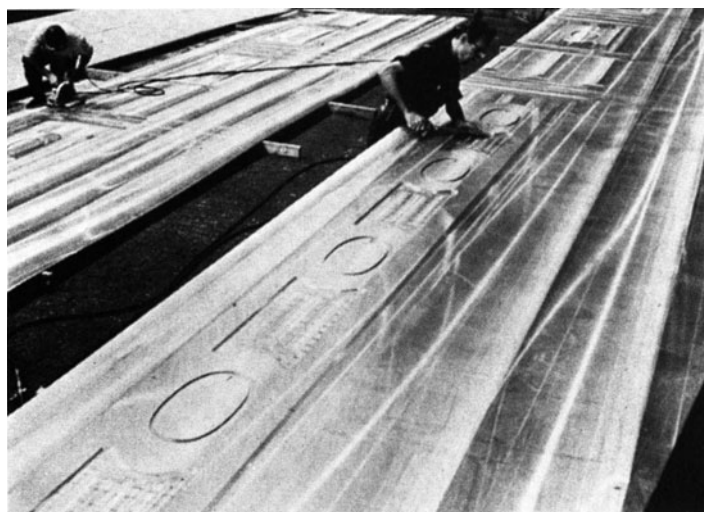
Final operations on machined aluminum plates for wings of large jet aircraft. (Reynolds Metals Company.)
